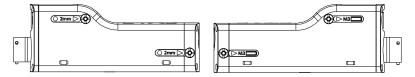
Openings for Cable Fasteners in ES400 Modules
